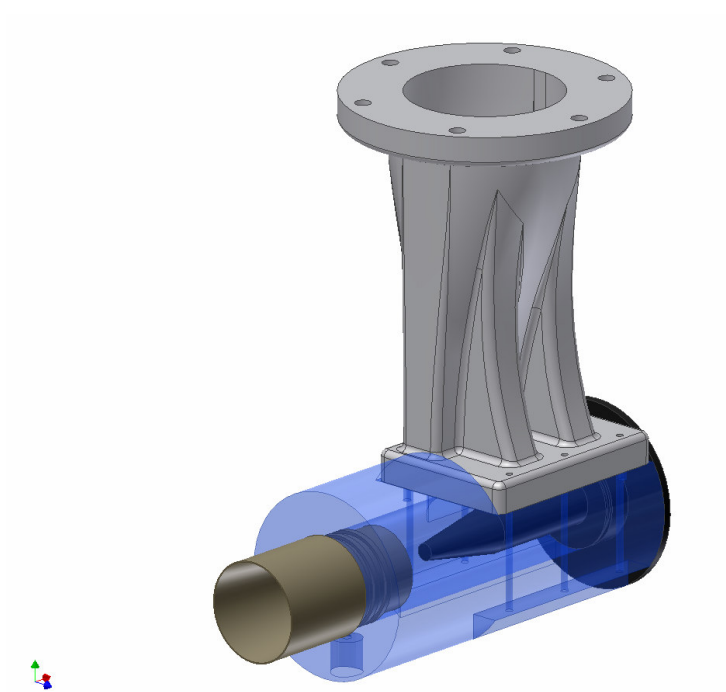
Modified acrylic cyclone assembly with rapid-prototyped inlet.
